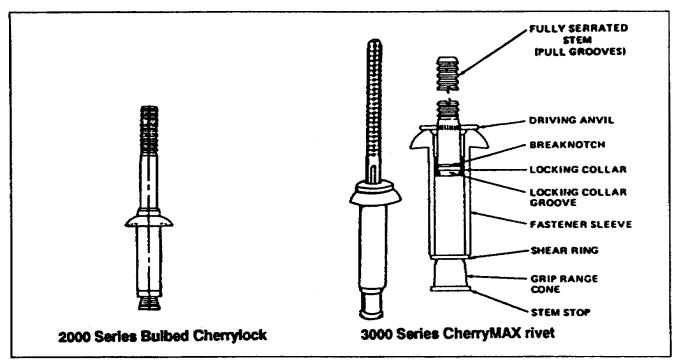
Self-Plugging (Mechanical Lock) Rivets.
